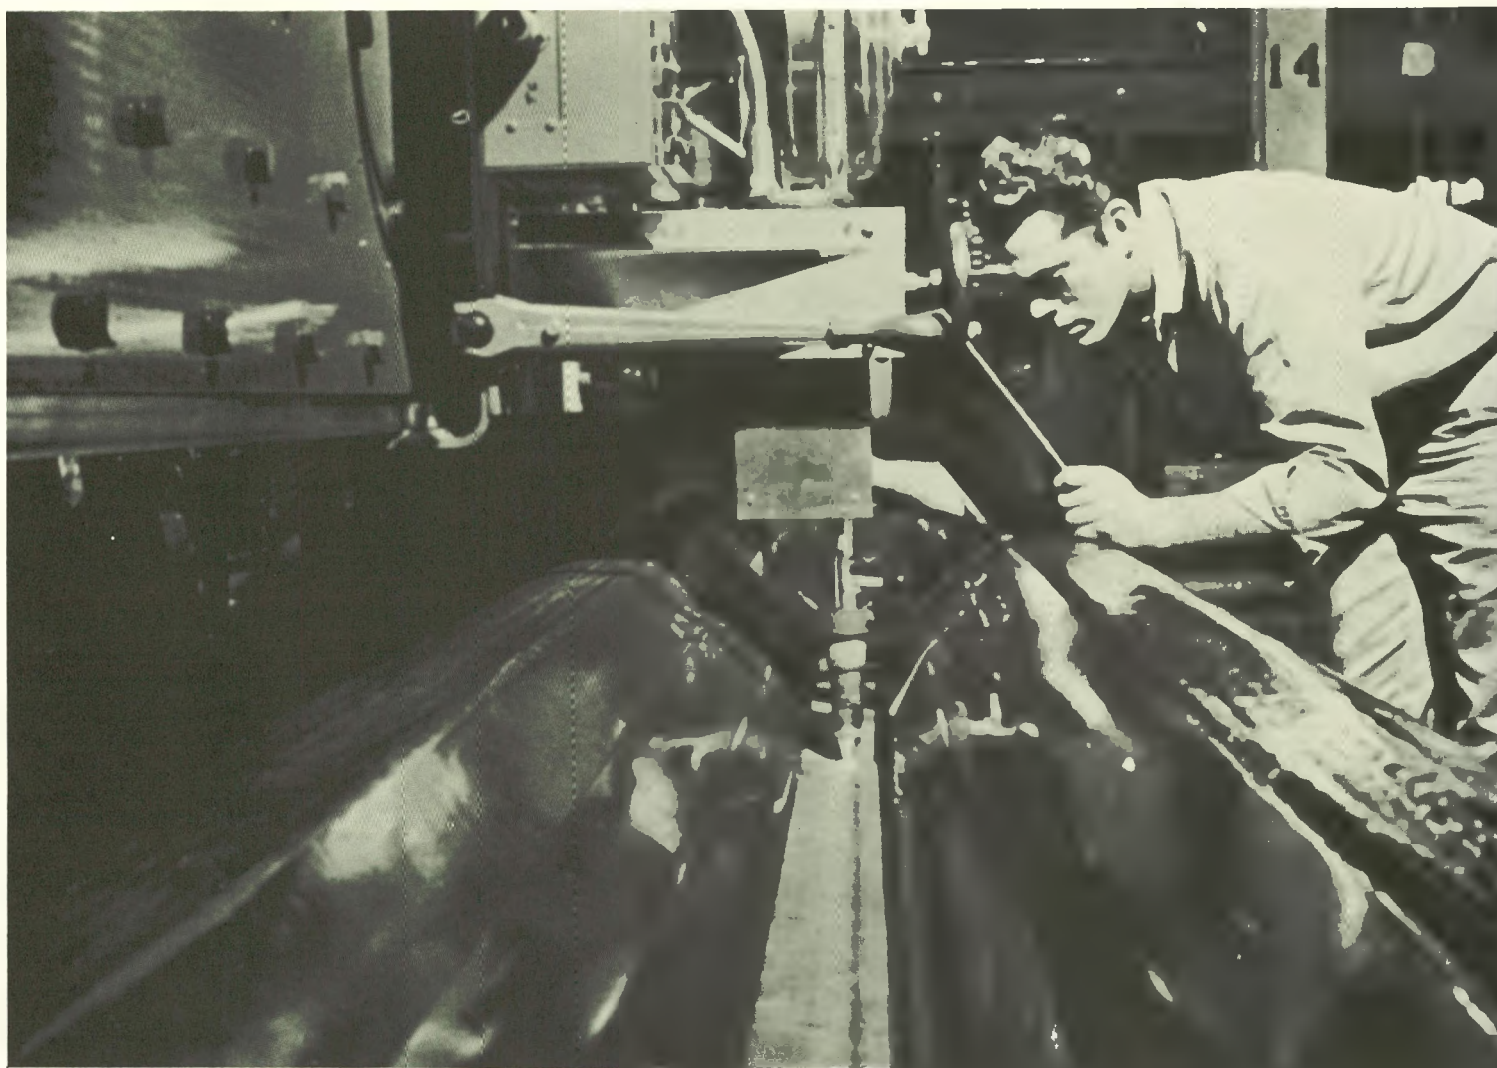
GTA MELT-THROUGH WELDING OF
